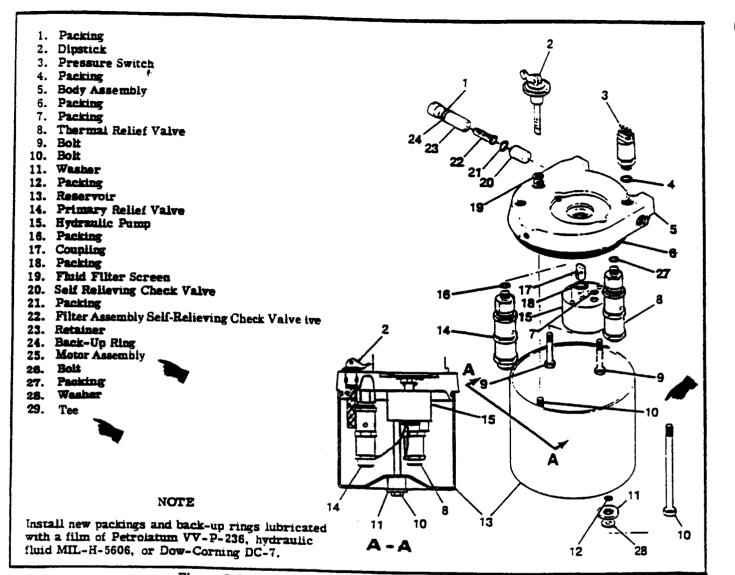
Hydraulic Power Pack Assembly (Sheet 1 of 2)
